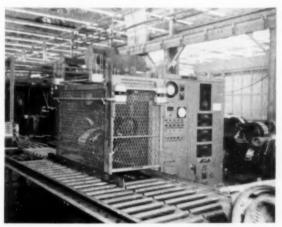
C—Slow conveyor line test enclosure, used for testing heavy equipment on a slow moving or manual conveyor line.
